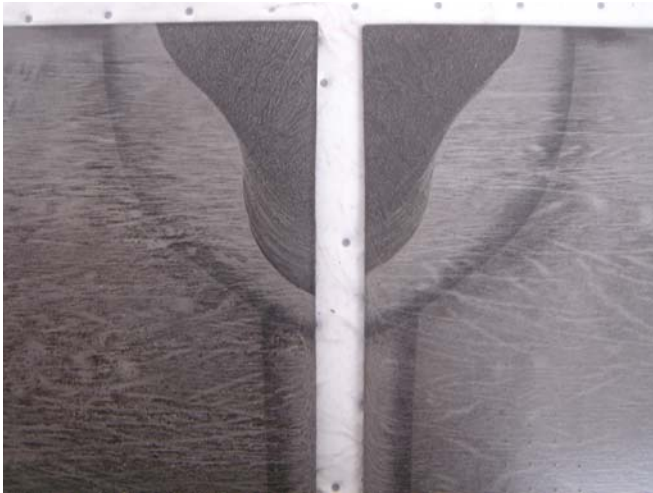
Macro Etch of a Longitudinal Cross Section of a Thermite Railhead Repair Weld made on an Electric Flash-butt Weld
